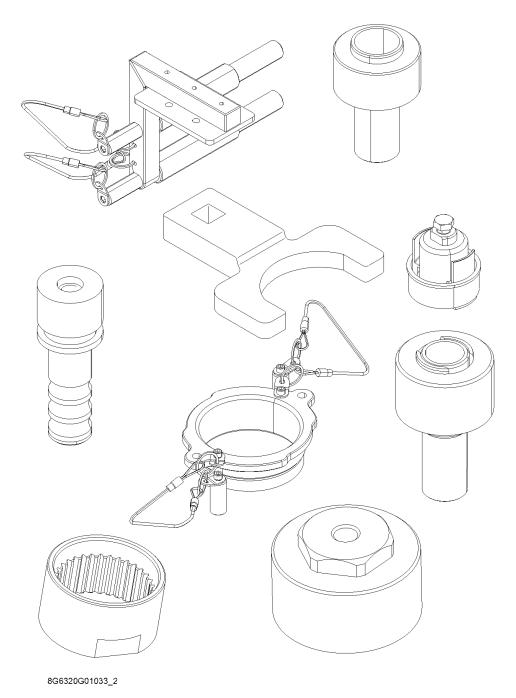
Tool Kit, MGB Drive Seal Replacement, Sheet 2 of 2
